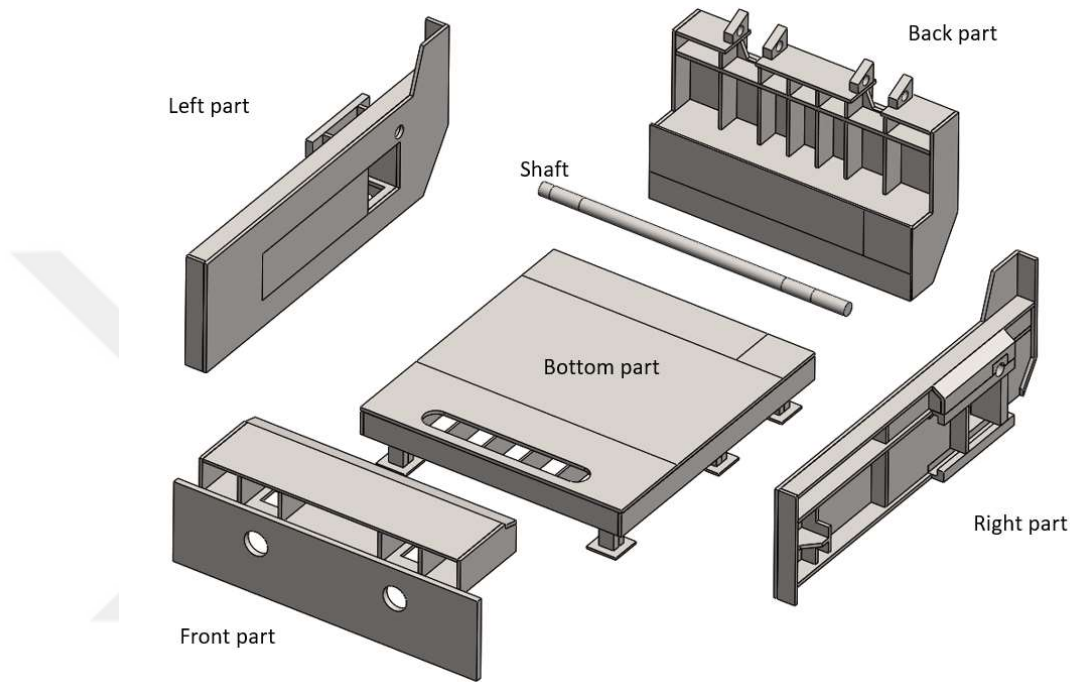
HP 60x60 3500x2500 exploded analysis model
